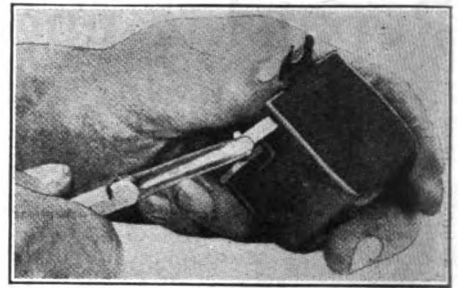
WITHDRAWING THE BAR FROM THE LATER TYPE OF CUT-OUT SO THAT THE COVER MAY BE REMOVED
